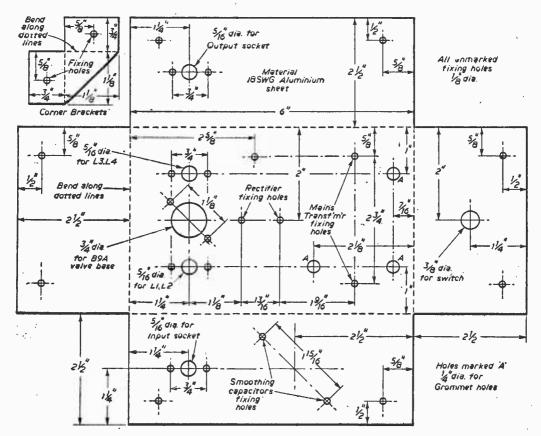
The drilling dimensions for the aluminium chassis (the details of the corner brackets are shown in the top left of the diagram).
